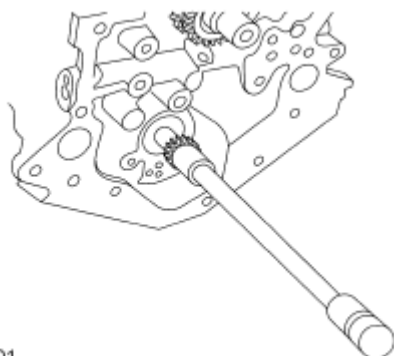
Locating Oil Pump Intermediate Shaft And Oil Pump And Bolt
